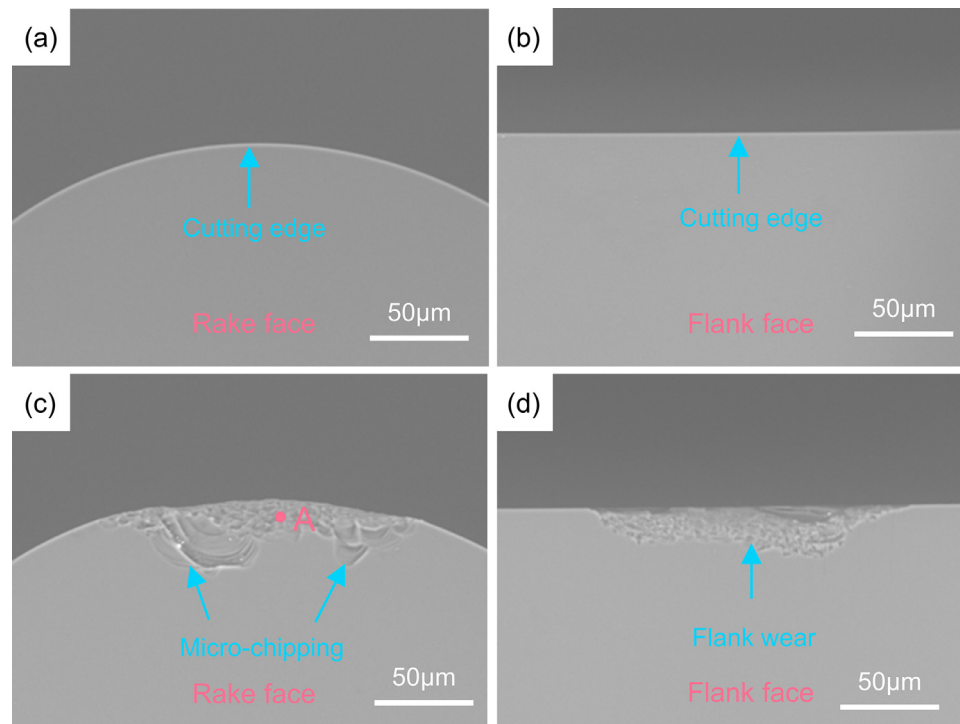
SEM images of the single-crystal diamond cutting tool. (a) Rake face of the new cutting tool, (b) flank face of the new cutting tool, (c) rake face of the worn cutting tool, and (d) flank face of the worn cutting tool.
